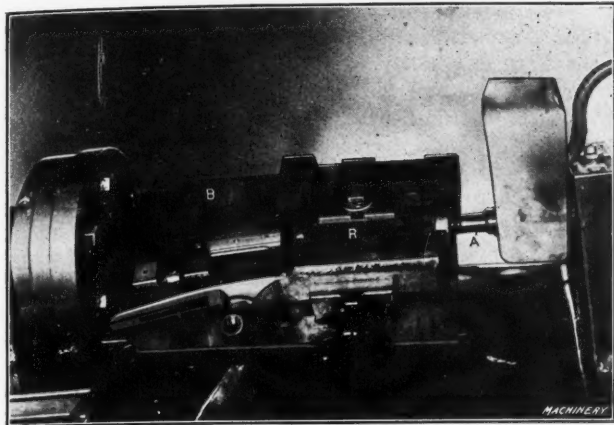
Detailed View of Special Machine used for milling Barrel Thread in End of Receiver
